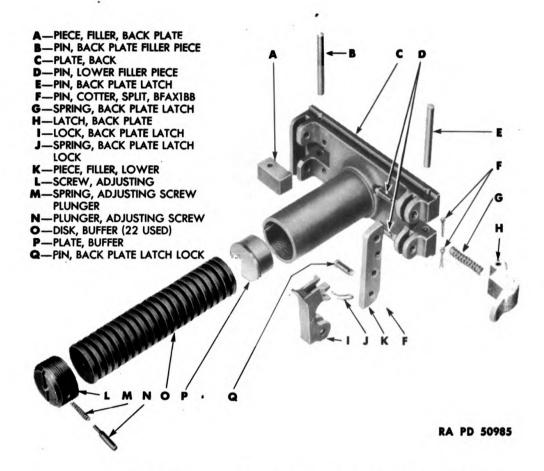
Back Plate With Horizontal Buffer Assembly (For Fixed Guns)—Exploded View
